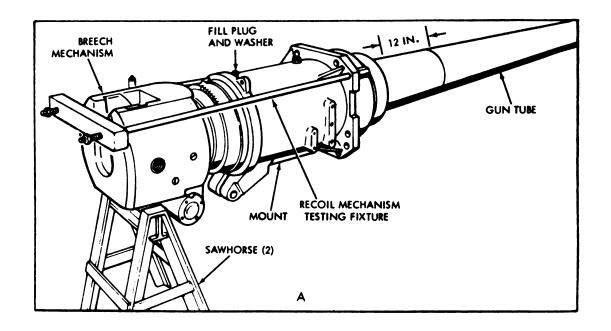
Cannon and combination gun mount disassembly or assembly (2 of 2).
